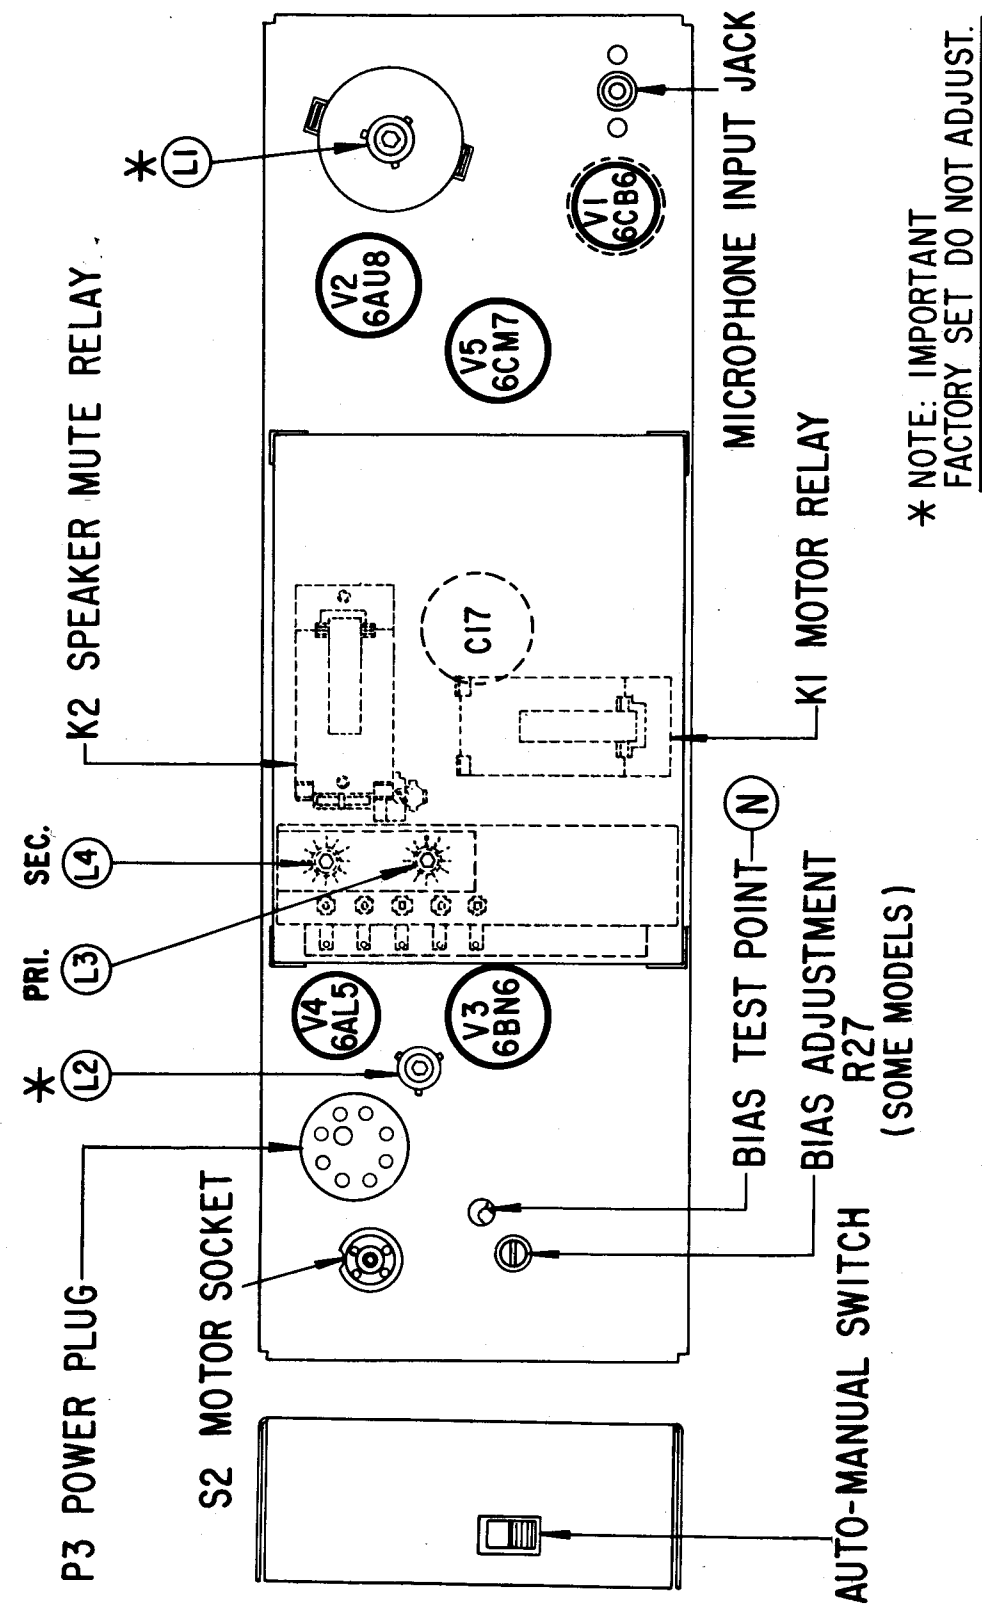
Control Chassis, Top View (5 tube unit #S-40511)
